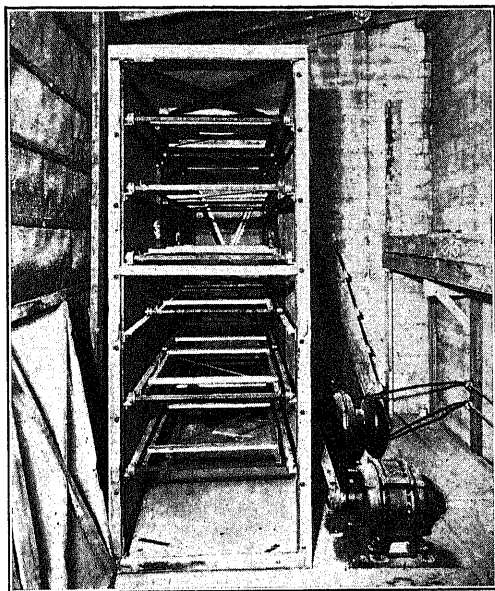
OVEN FOR HEATING ARMATURE COILS WHEN ASSEMBLING
